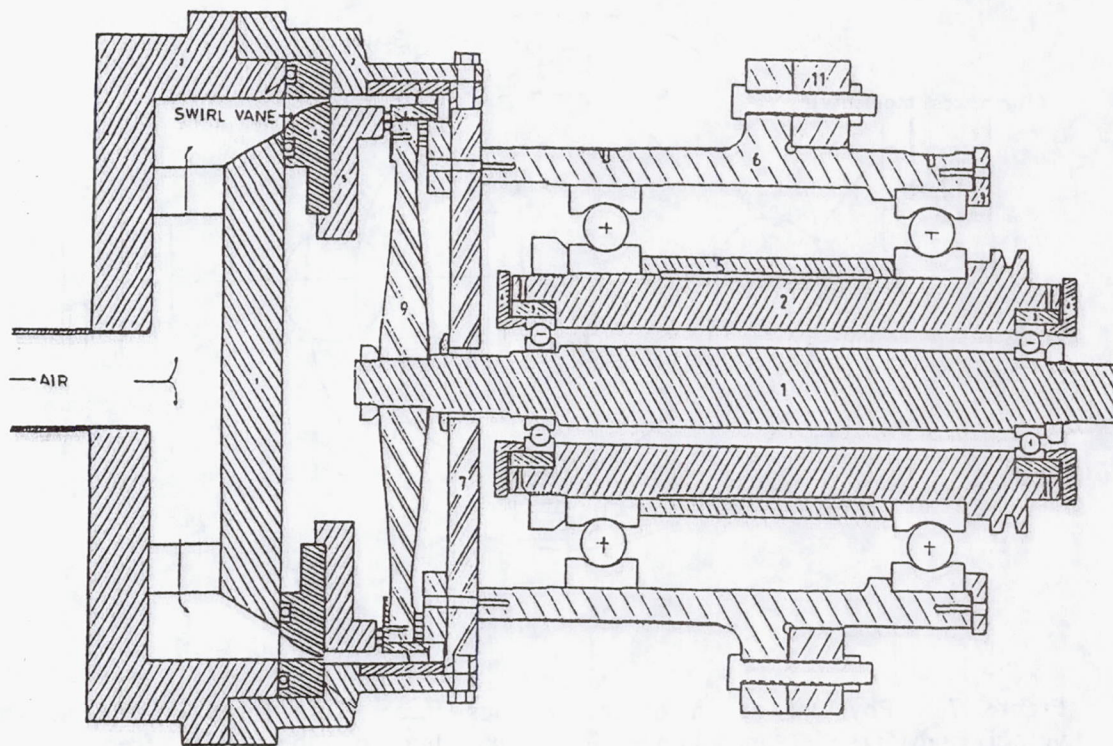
Cross section of the LSTF test section and nested spindle whirl/spin producing rotating machinery.
